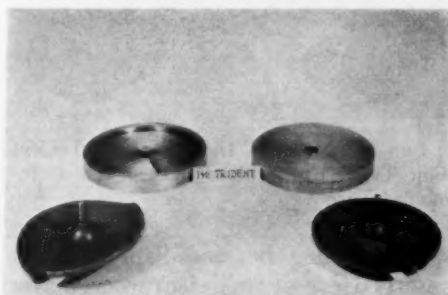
Molding Die for 1½-in. Trident Flat Type Disc With a Burned and a Remolded Disc
